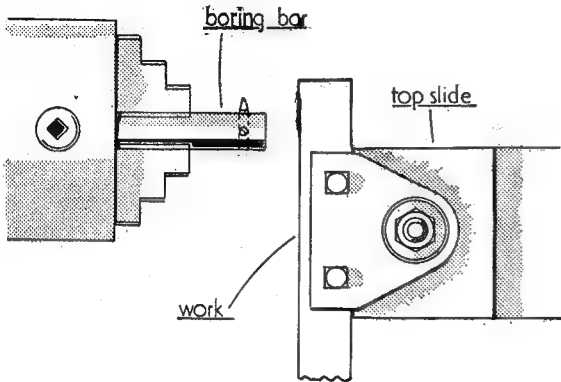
Using a boring bar to machine ■ large hole in ■ lever
